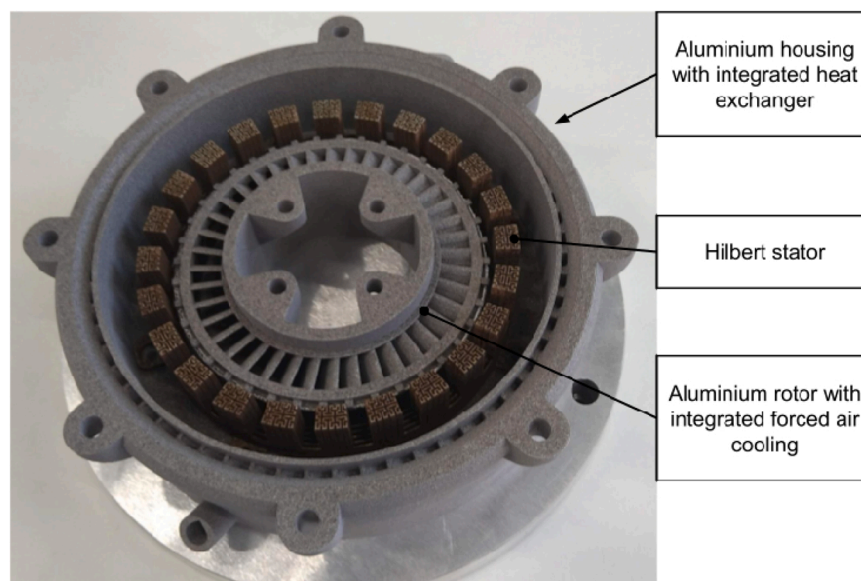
Demonstrator motor created mostly with AM, showing a soft magnetic FeSi stator core and rotor back iron, an aluminium housing and rotor. The bearings and permanent magnets are not created using AM.
